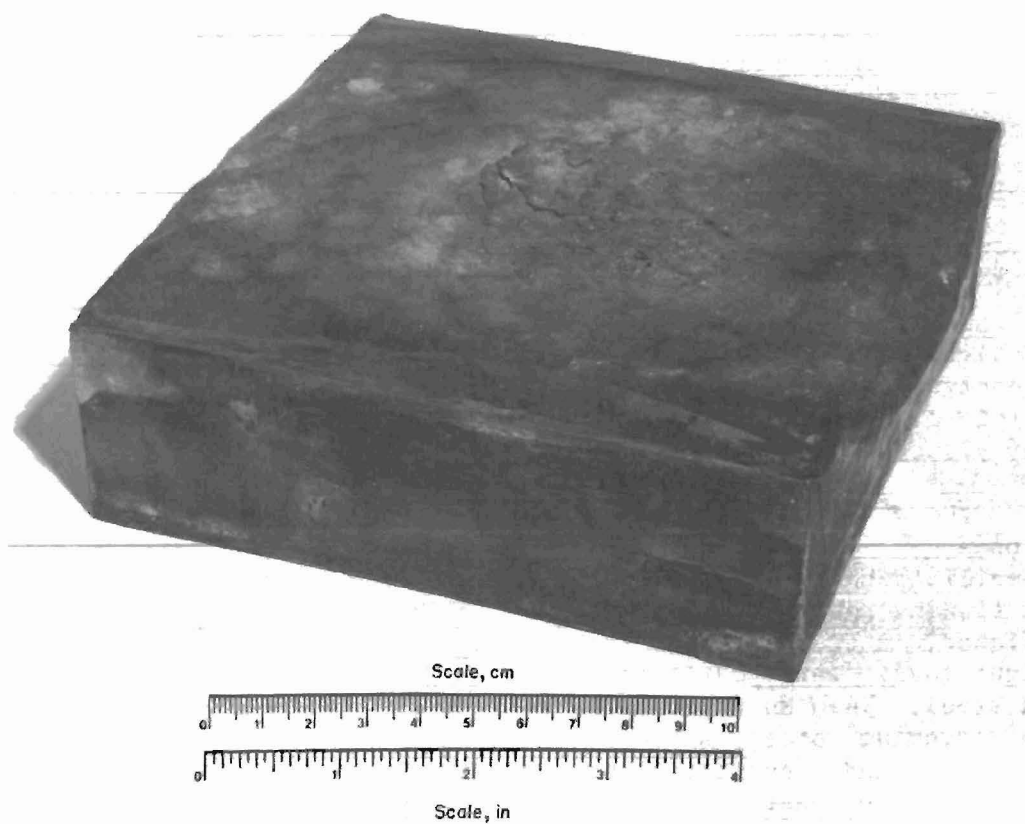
Flaking of a test block. Mild steel (block 1) after 50,000 impacts.
